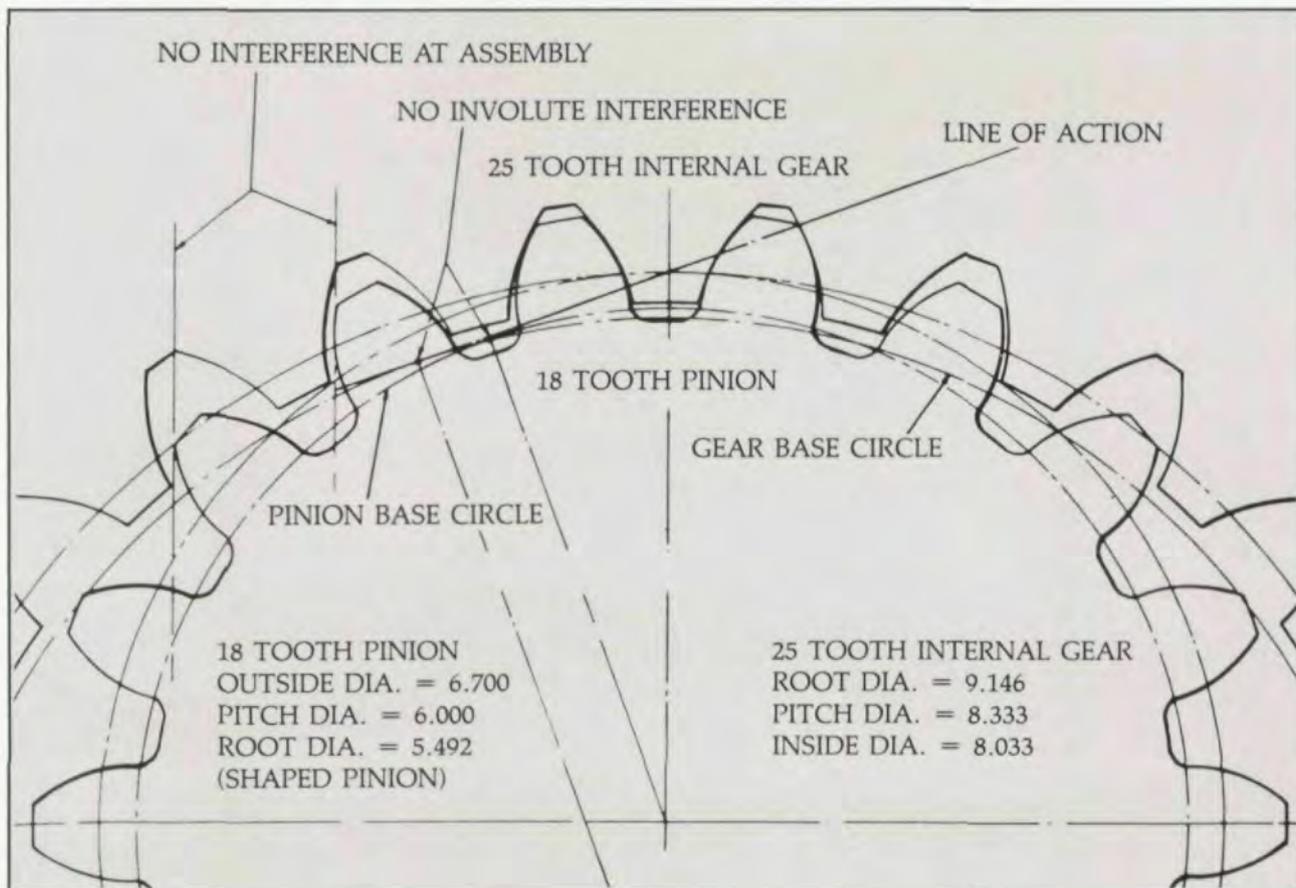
DP-20° Stub Tooth Form — Recommended Design
